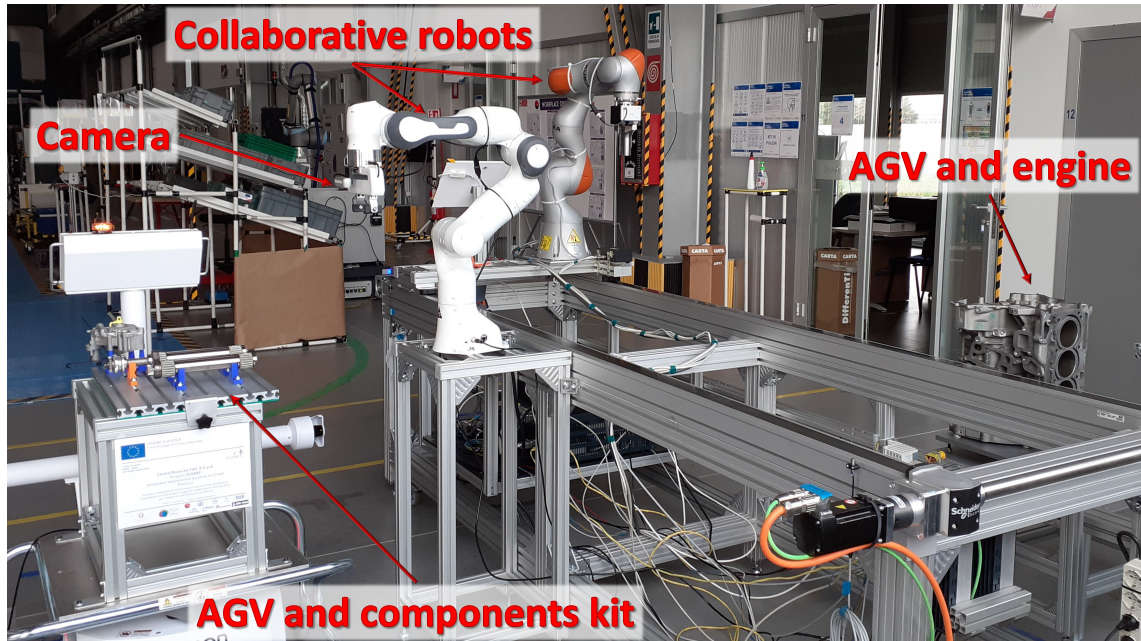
Industrial setup for shafts assembly into an engine block.
